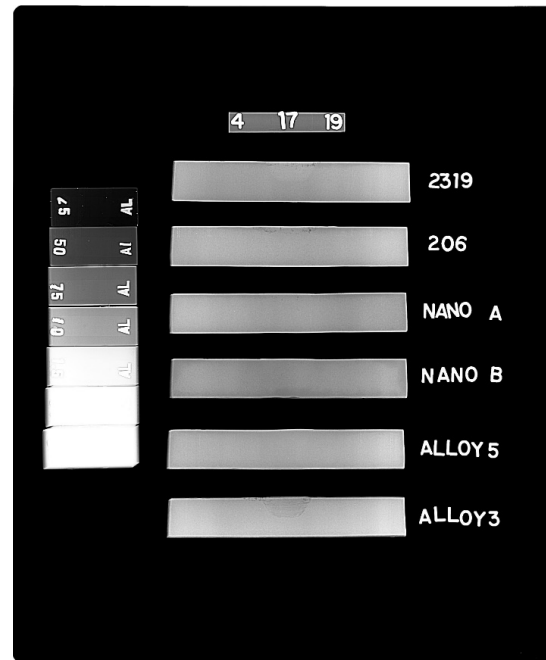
Porosity defects on the surface of the weld area. Cross section of plates from Figure 21, welded at 350F (177C) with argon shielding gas.
